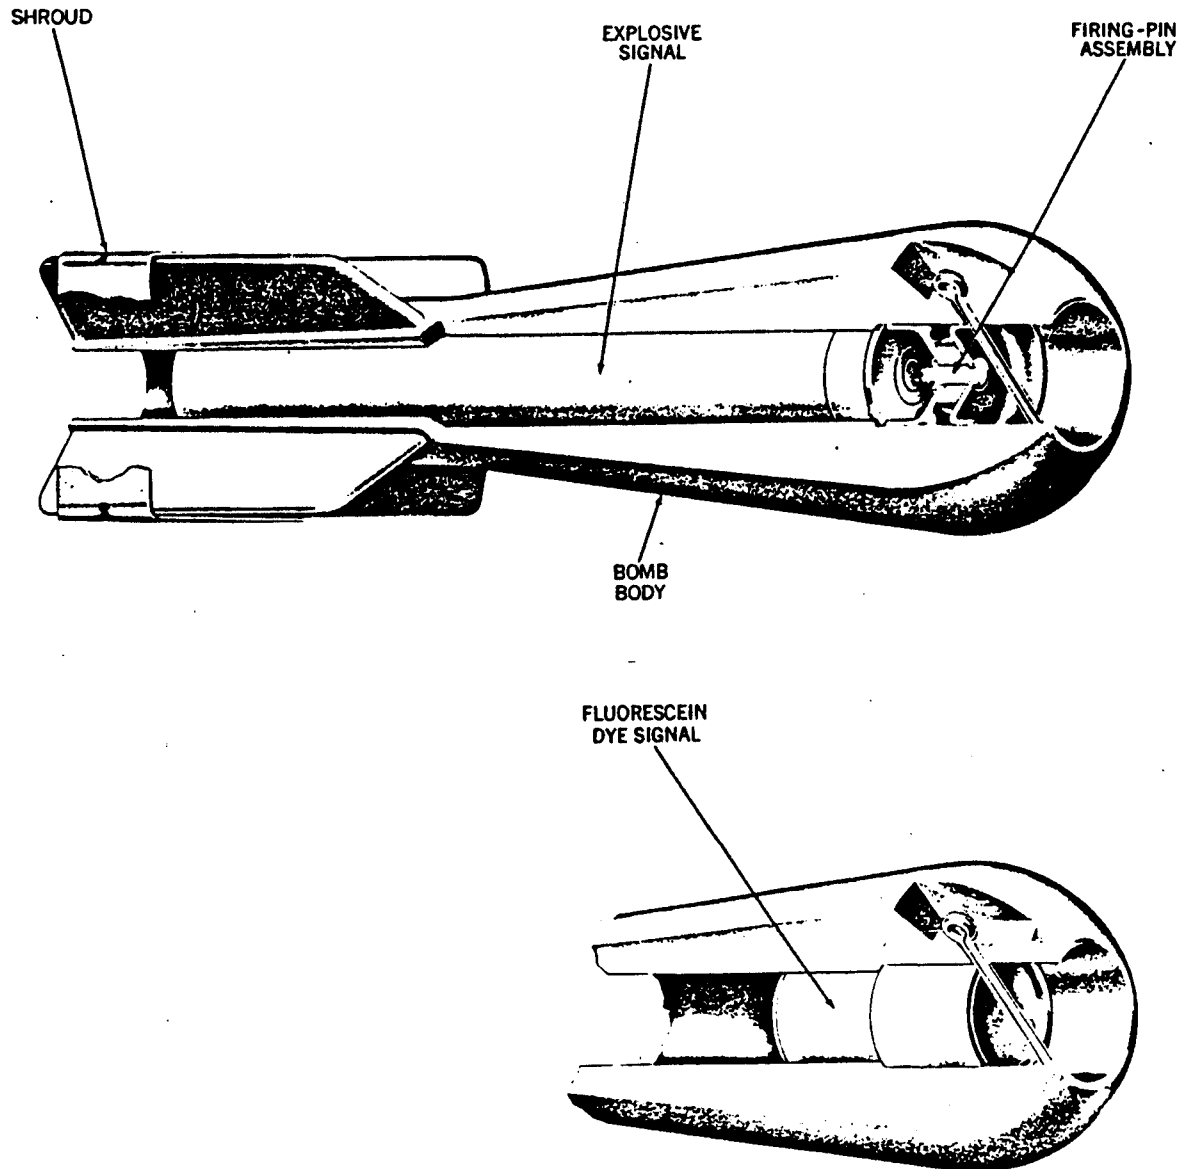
3-lb Miniature Practice Bomb AN-Mk 23 Mod 1, Cutaway View and Detail Showing Signal Mk 5 Mod 0 Installed.
